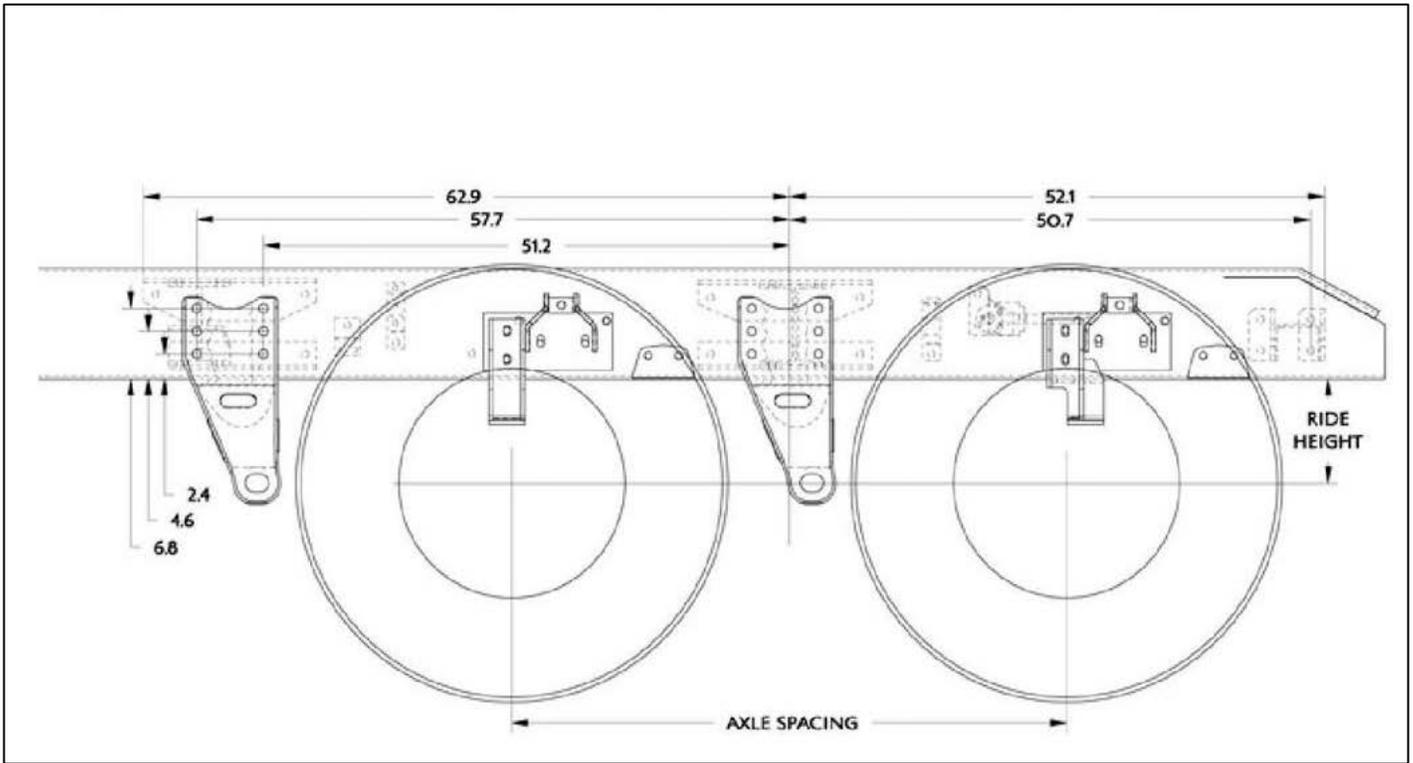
Neway ADZ 252 Frame Drilling (Dimensions In Millimeters)
